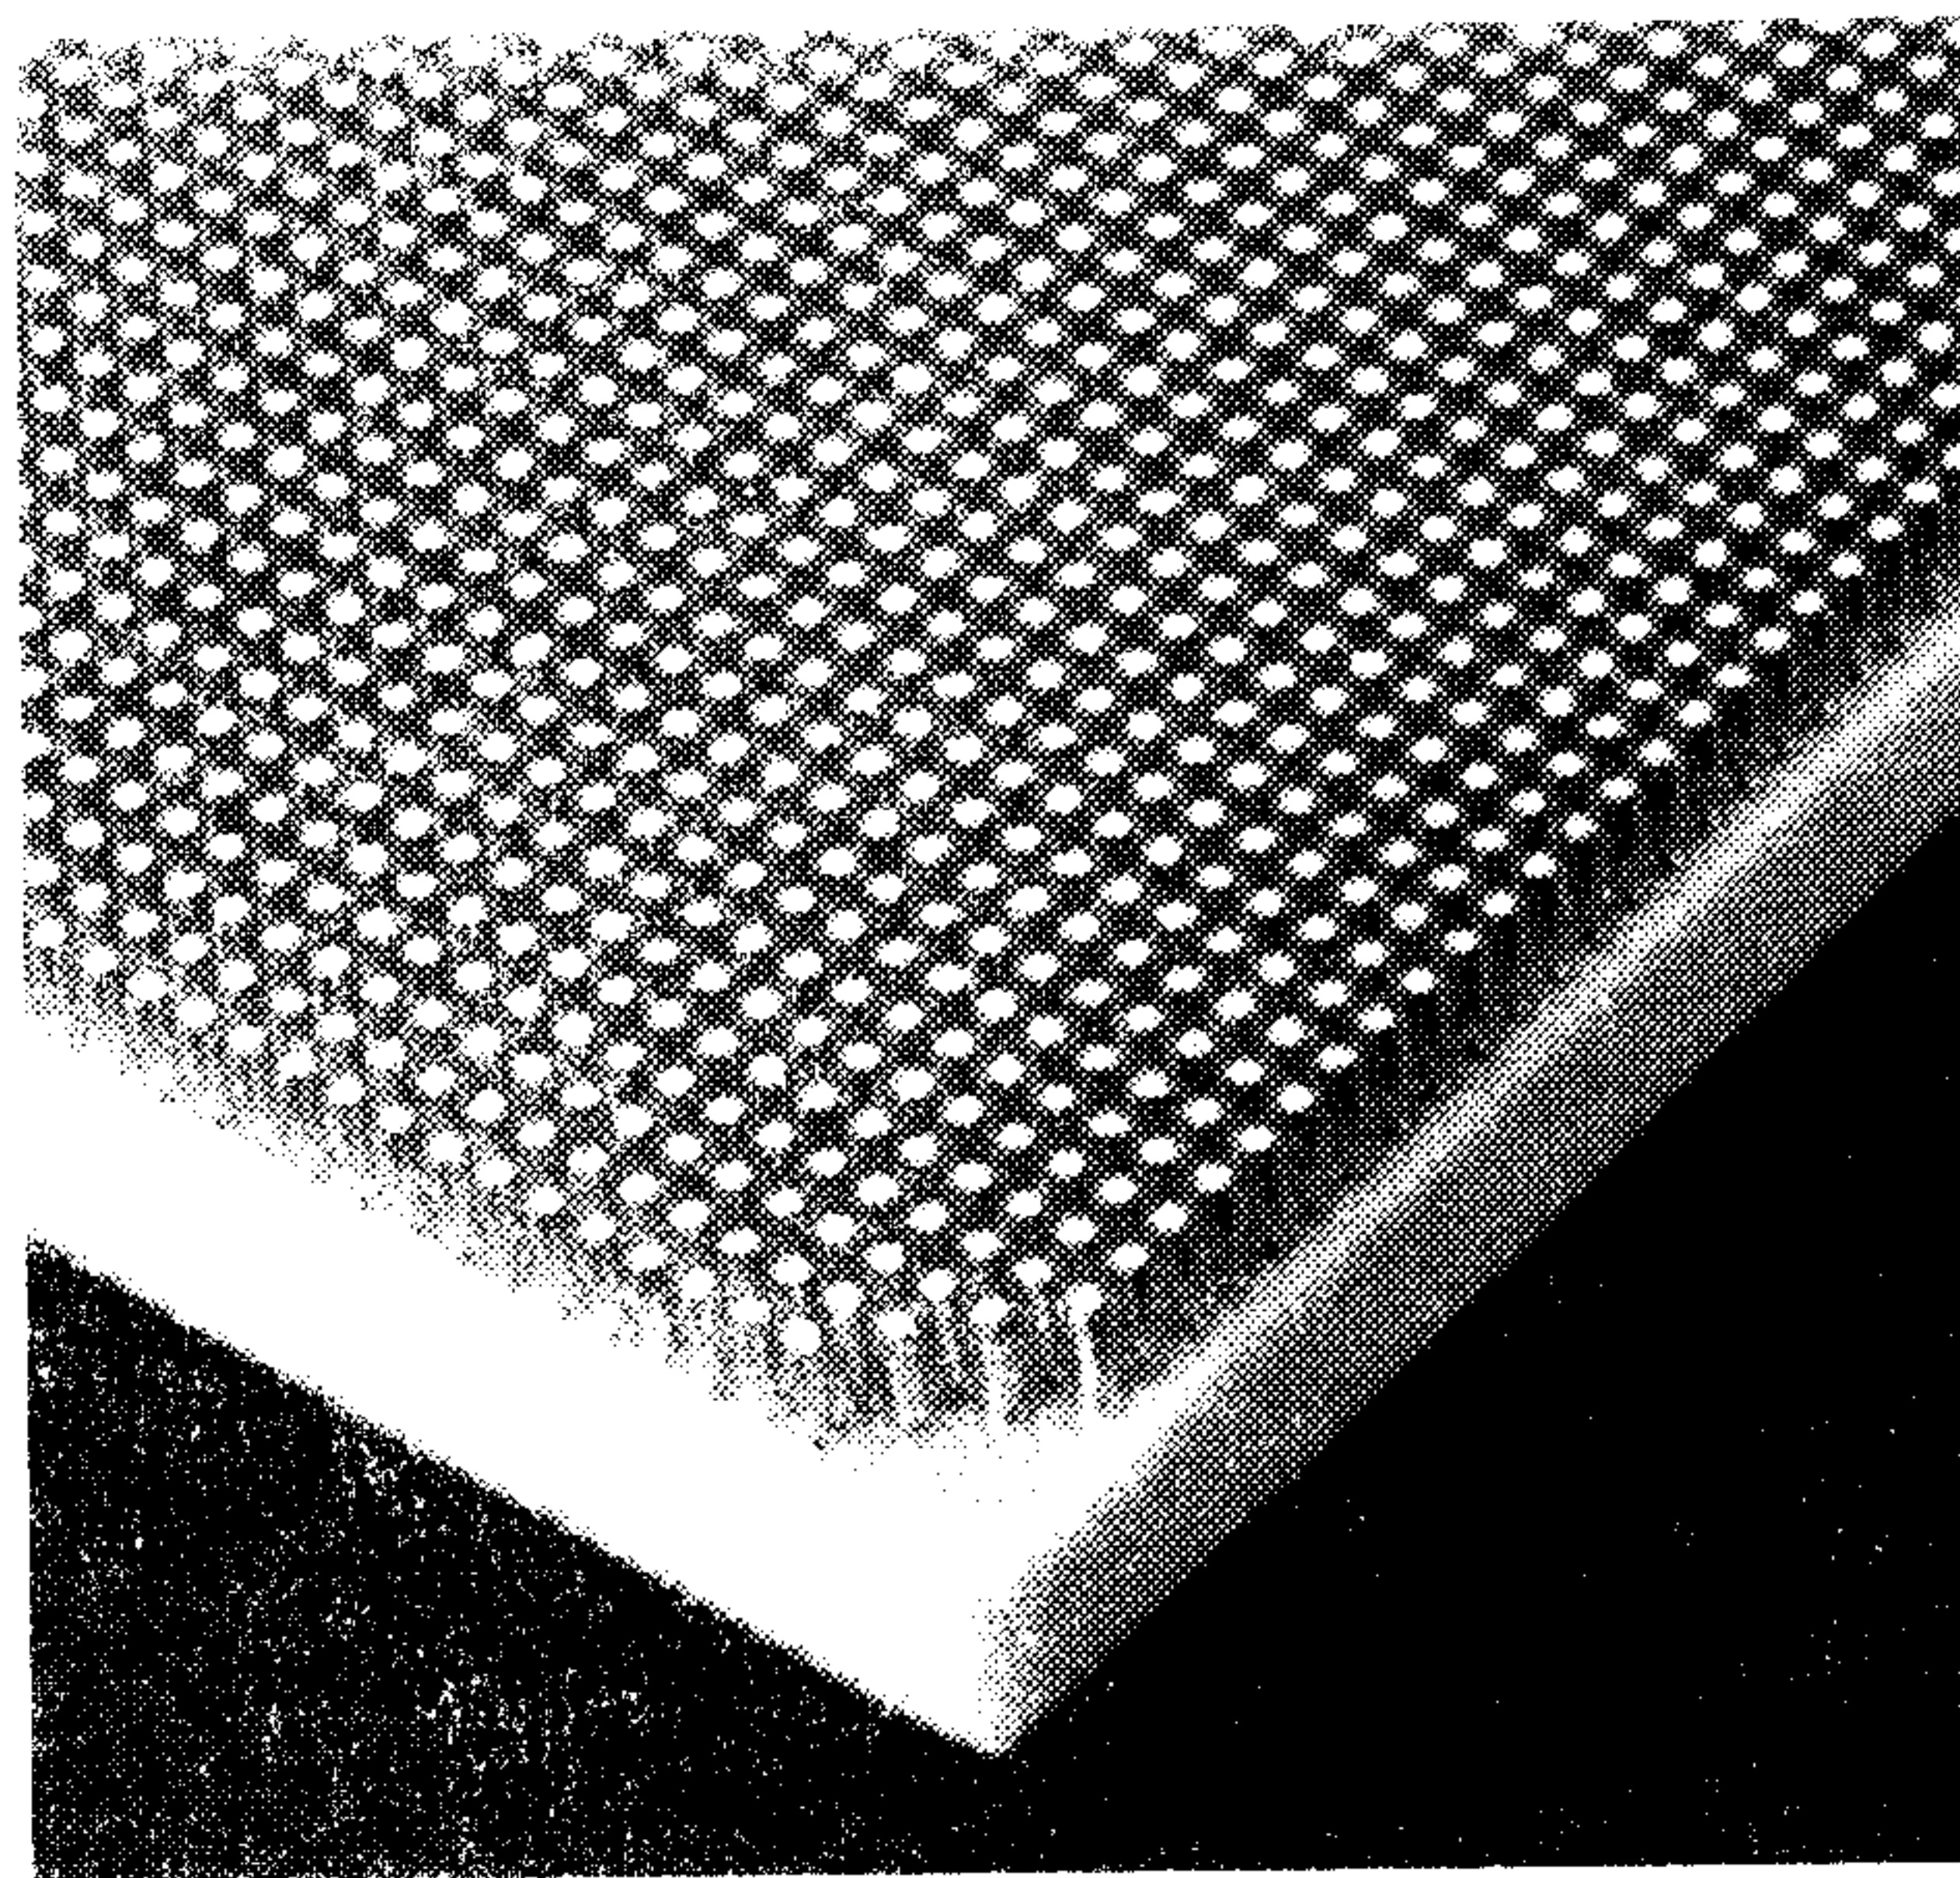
Column grid array with columns replacing solder balls to improve solder joint fatigue life
